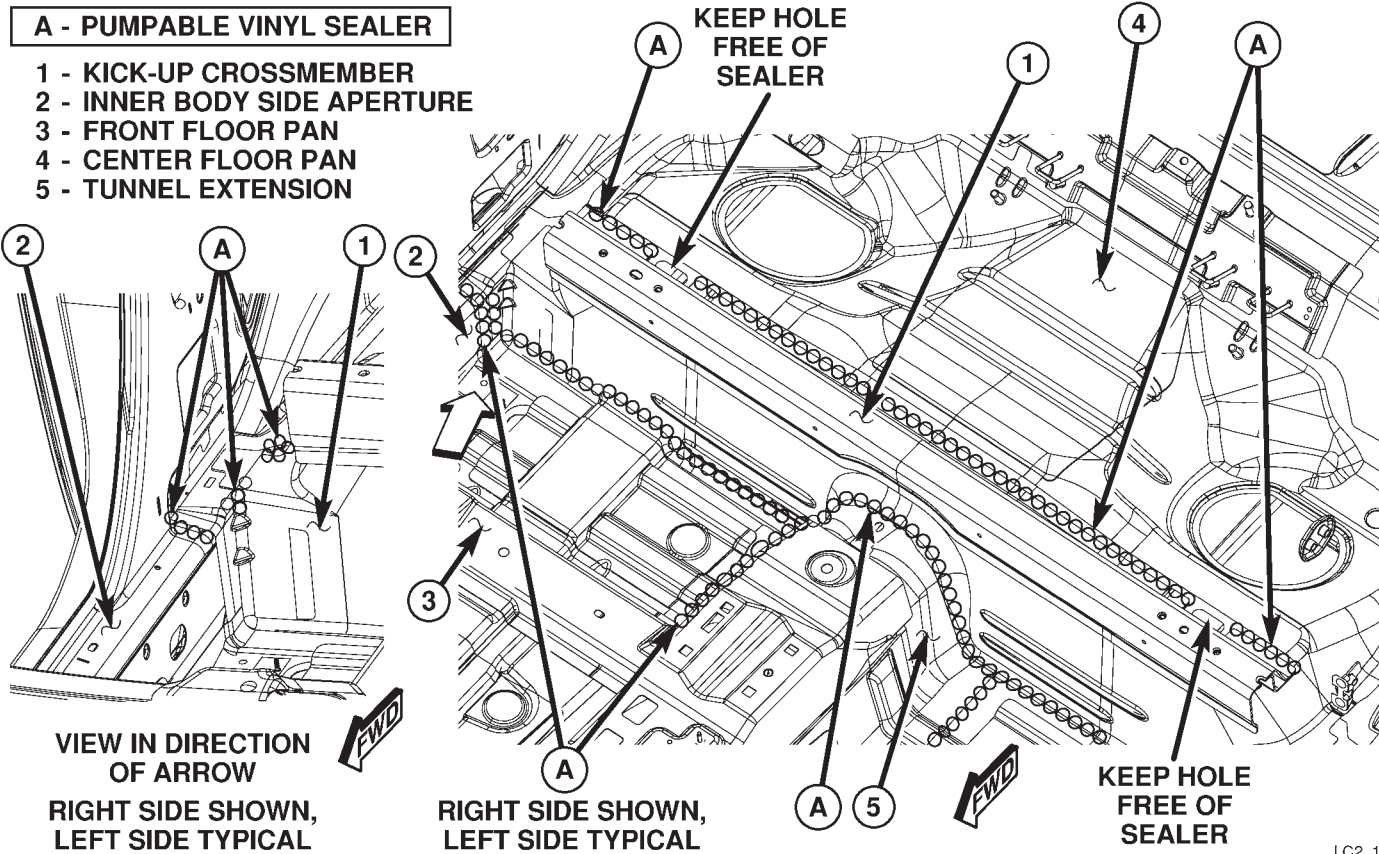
KICK-UP CROSSMEMBER/FLOOR PAN
